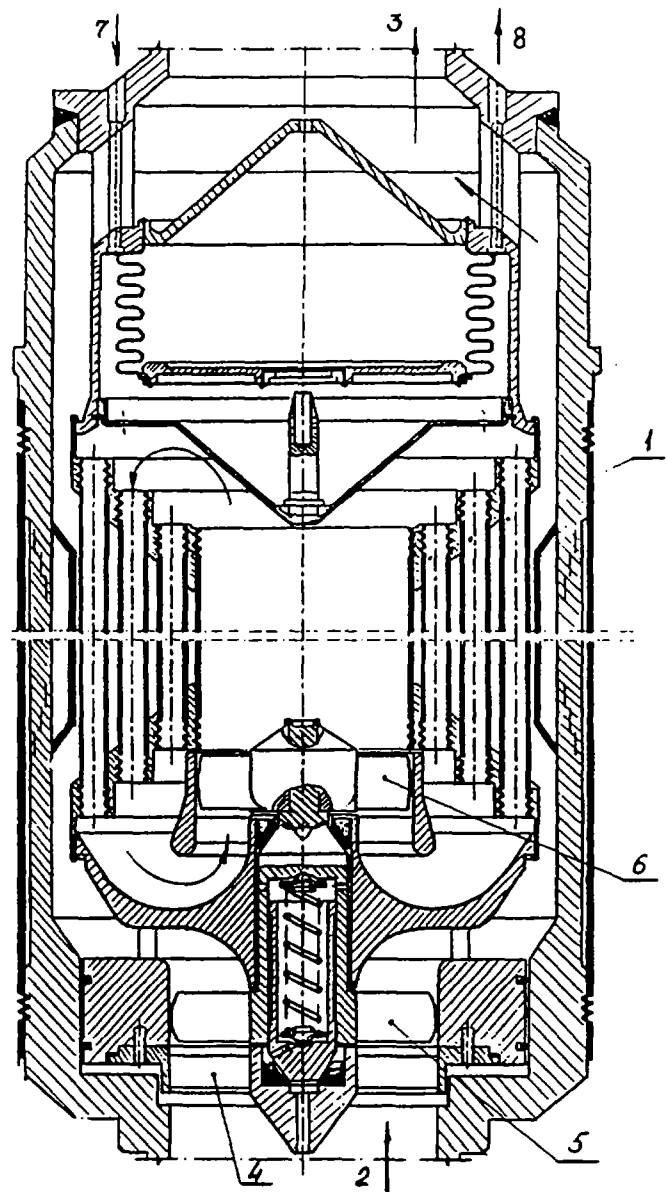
Vertical cross section of the fluid fuel element. 1 - fluid fuel circuit, 2 - coolant inlet, 3 - coolant outlet, 4 - flow guider, 5 - turbo-drive, 6 - pump, 7 - feed inlet, 8 - fuel regeneration outlet
